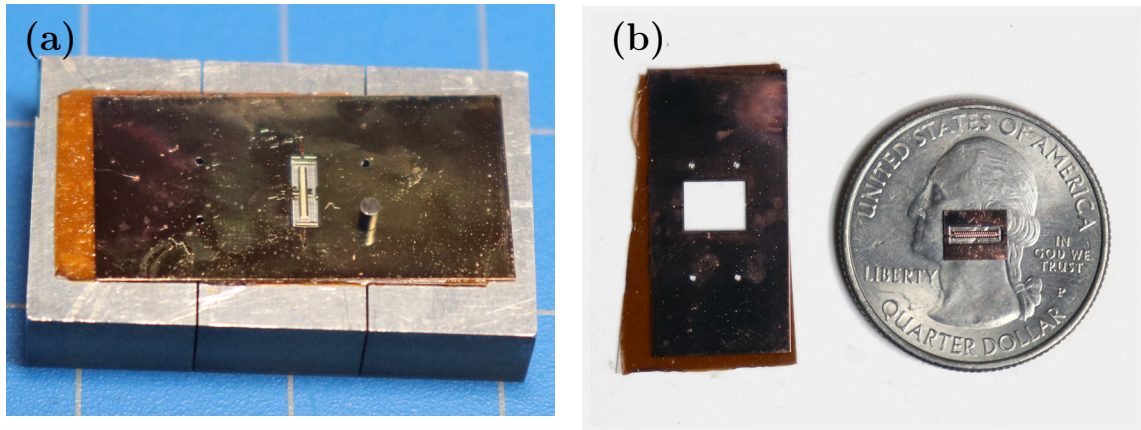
(a) Assembled and bonded layers of comb-drive actuator. (b) The device cut-out from the laminated layers using laser cutting.
